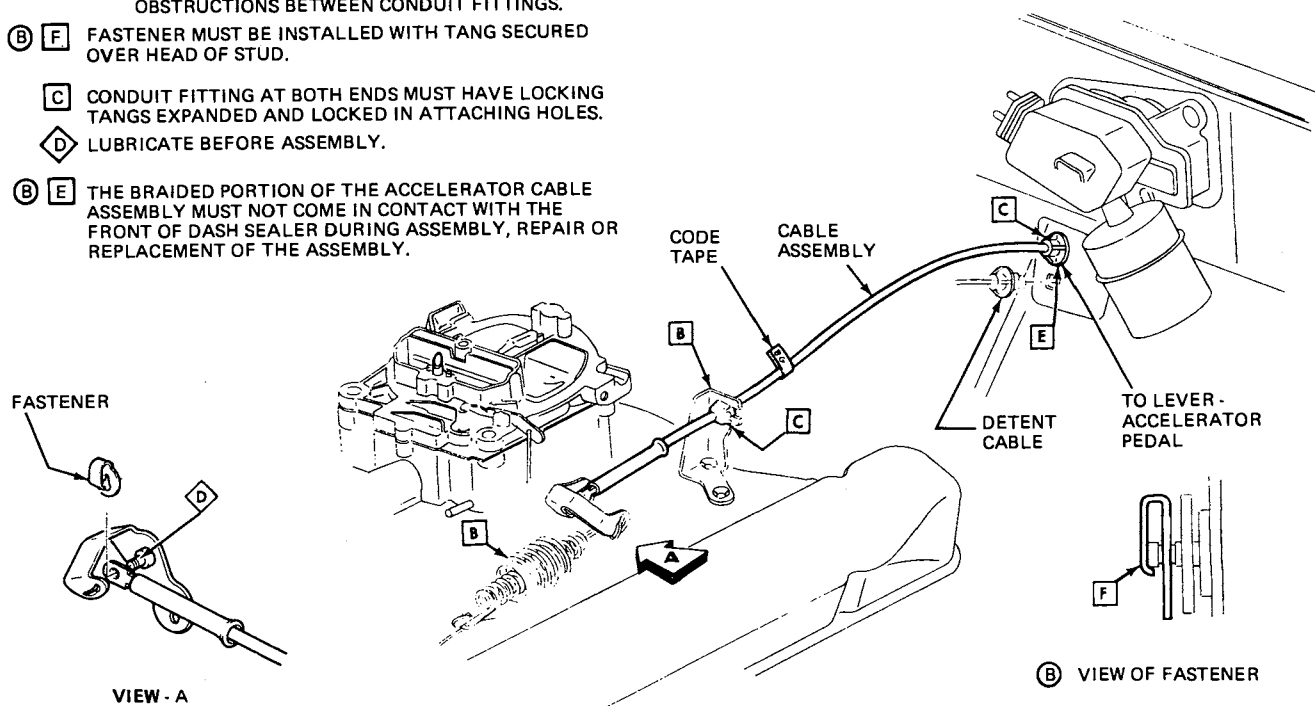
E-44C - Accelerator Controls "A-B" 350 2 Bbl. and 4Bbl.
